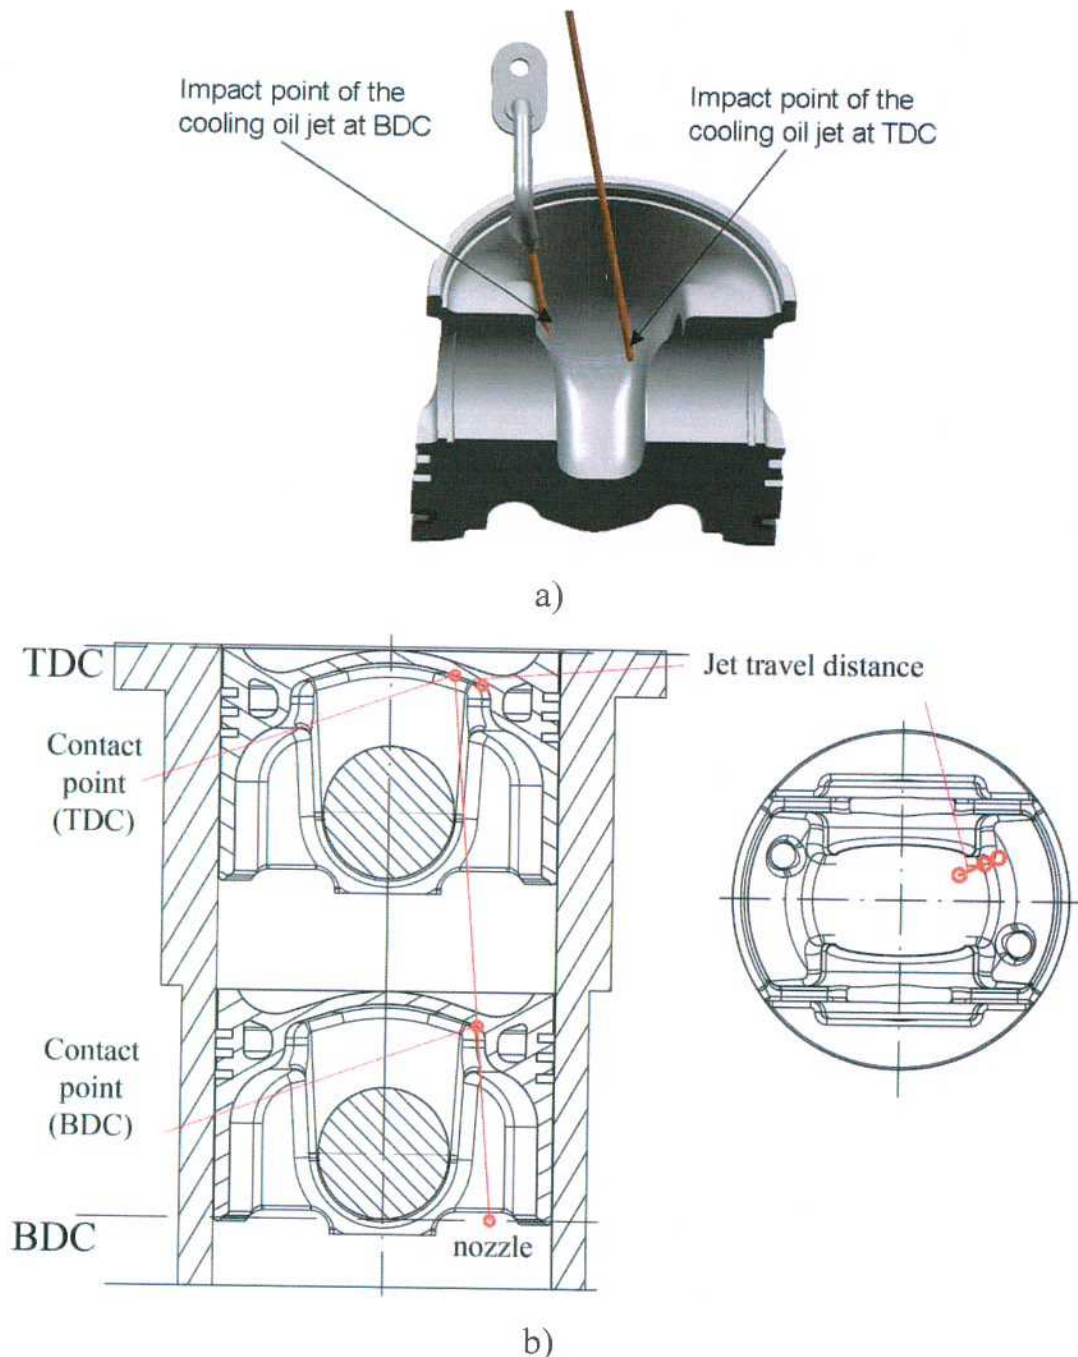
Diesel piston with spray jet cooling of the undercrown: a) schema of the cooling process[5], b) A spray travel distance for the designed piston
